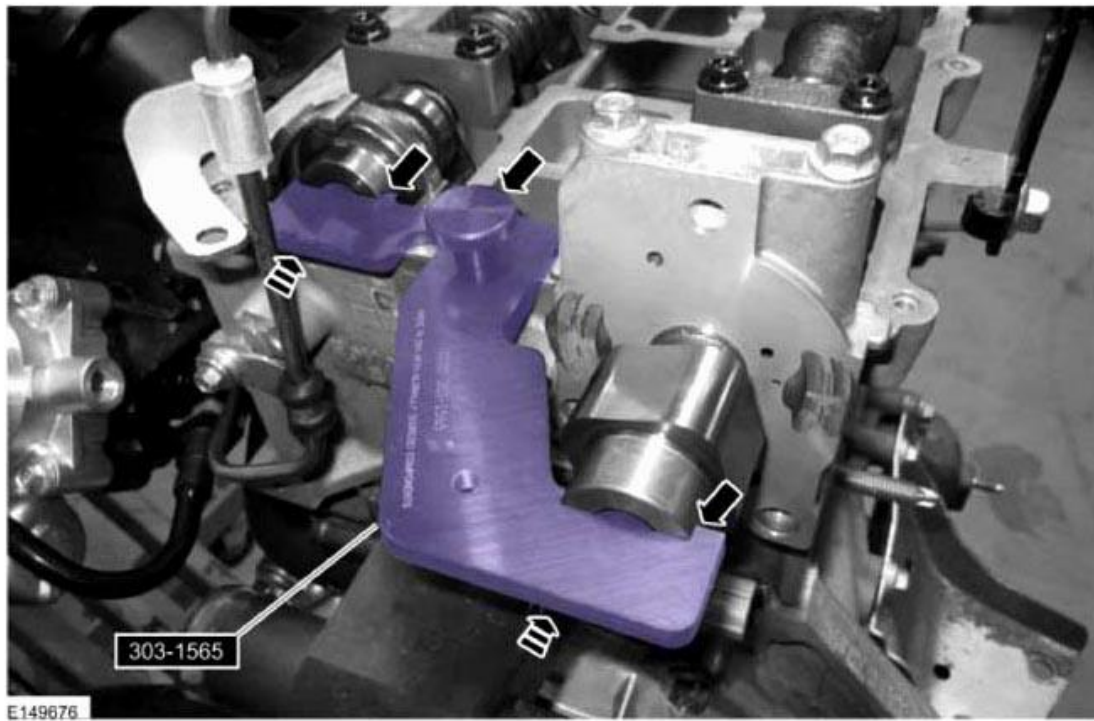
Installing Camshaft Alignment Tool Into Rear Of Both Of Camshaft Slots
